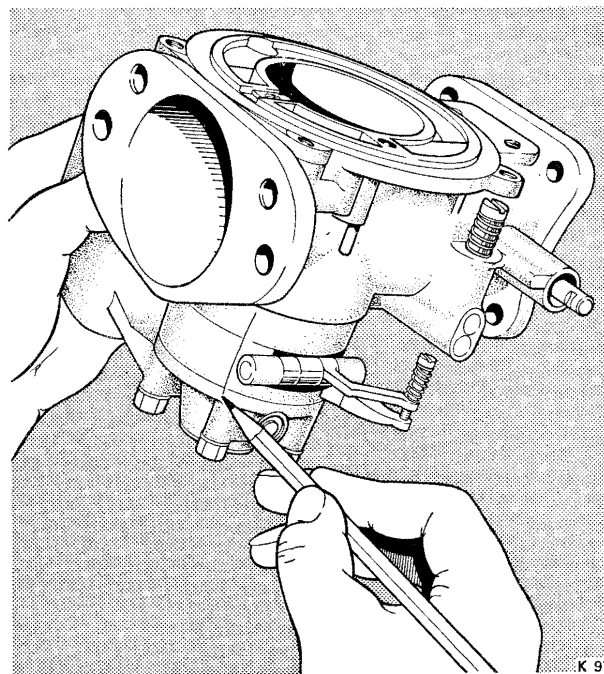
SCRIBING CARBURETTER CORRELATION MARKS
